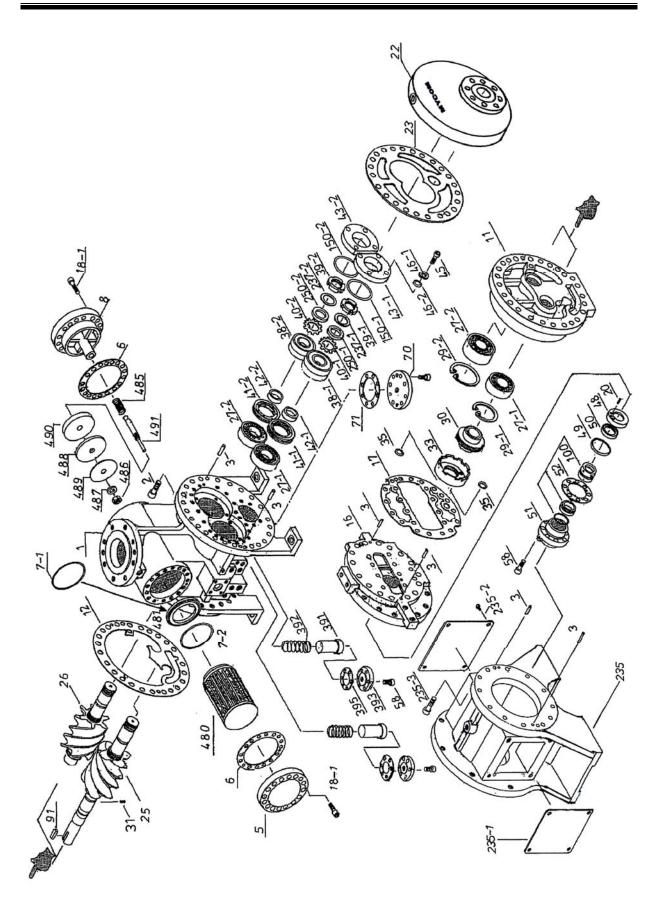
Development View of i160S/L Parts with Motor Spacer
